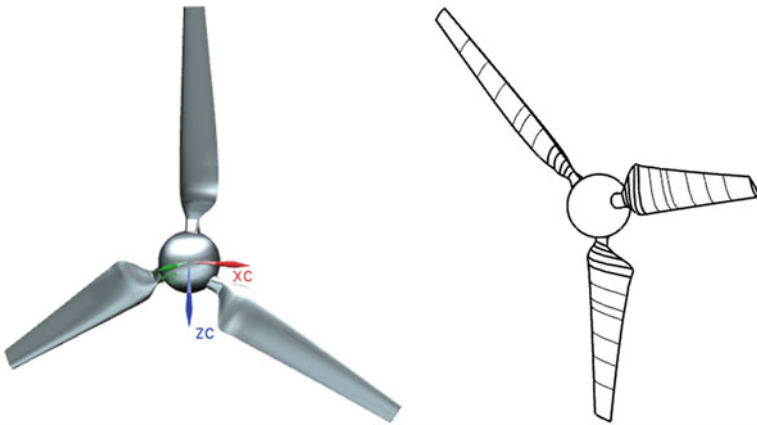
CAD turbine model of horizontal rotation axis and its view with segment division
